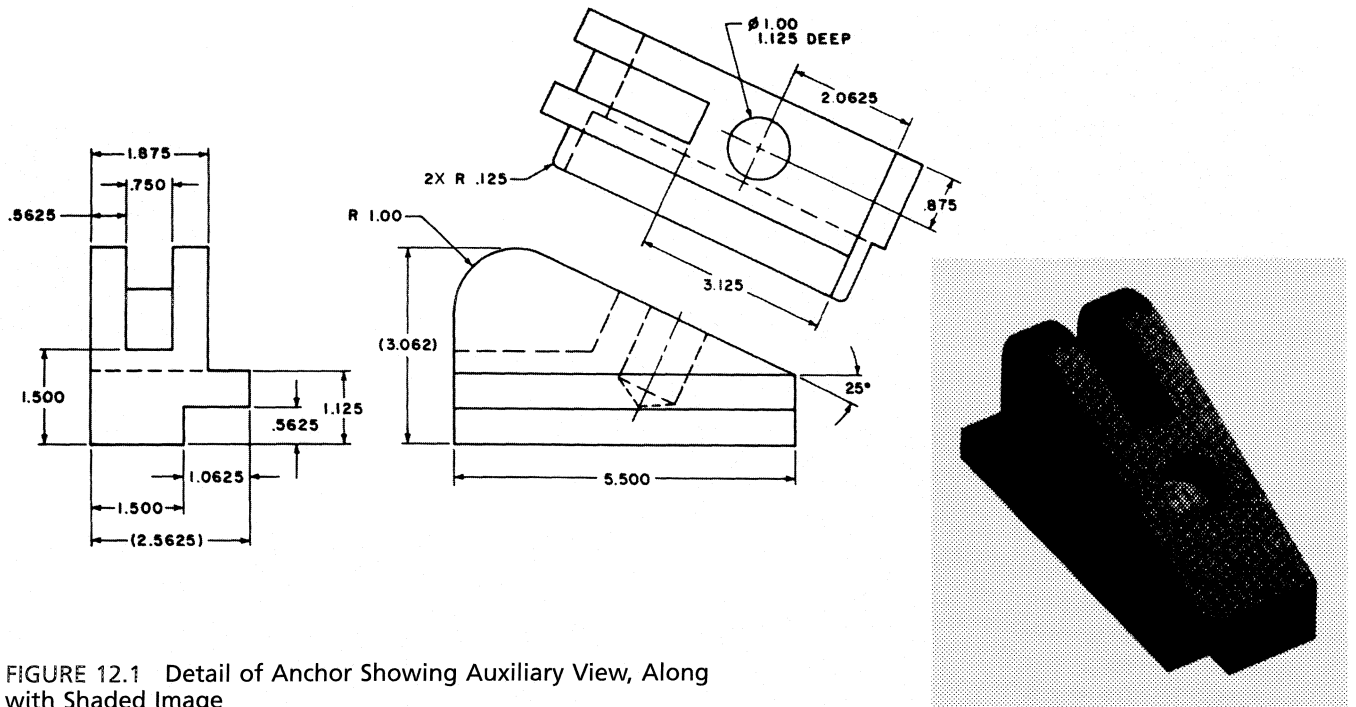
Detail of Anchor Showing Auxiliary View, Along with Shaded Image
